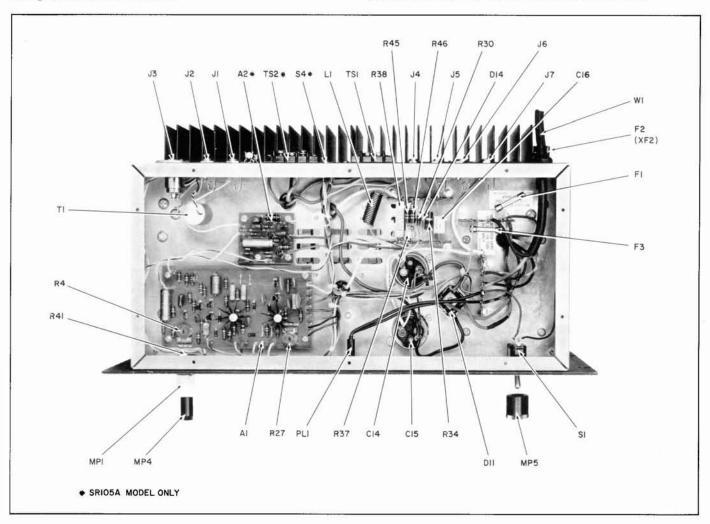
SR105 POWER AMPLIFIER BOTTOM VIEW, COVER REMOVED (SR105A MODEL SHOWN)
